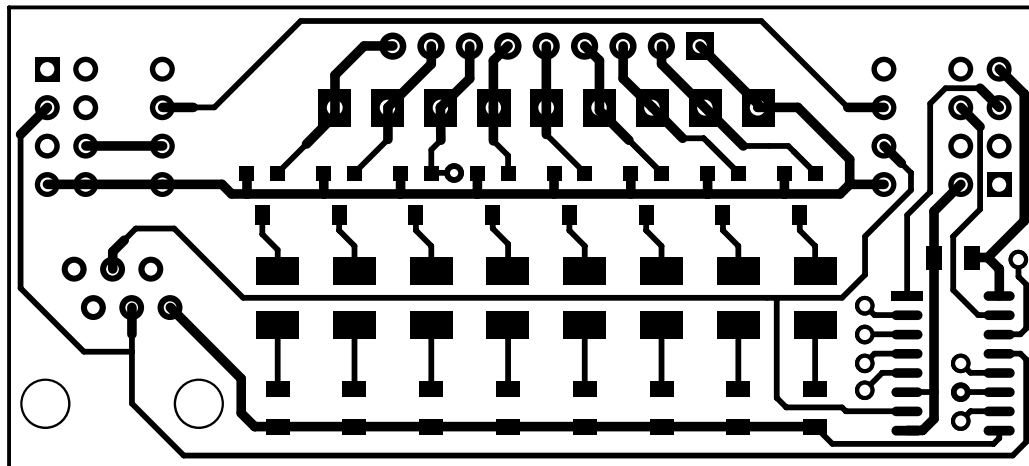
Input Expander Module PCB Copper Pattern (Top Layer)
